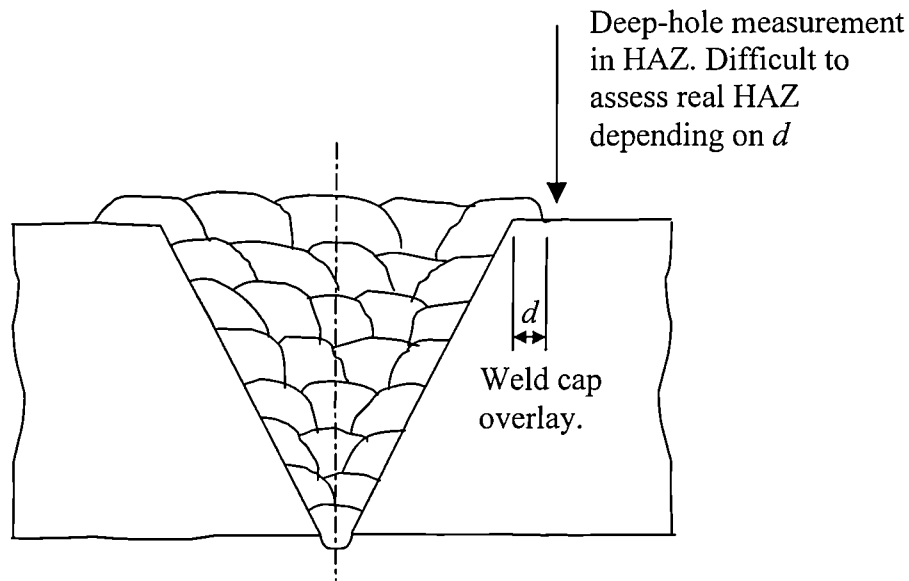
General layout of deposited weld beads (example).
